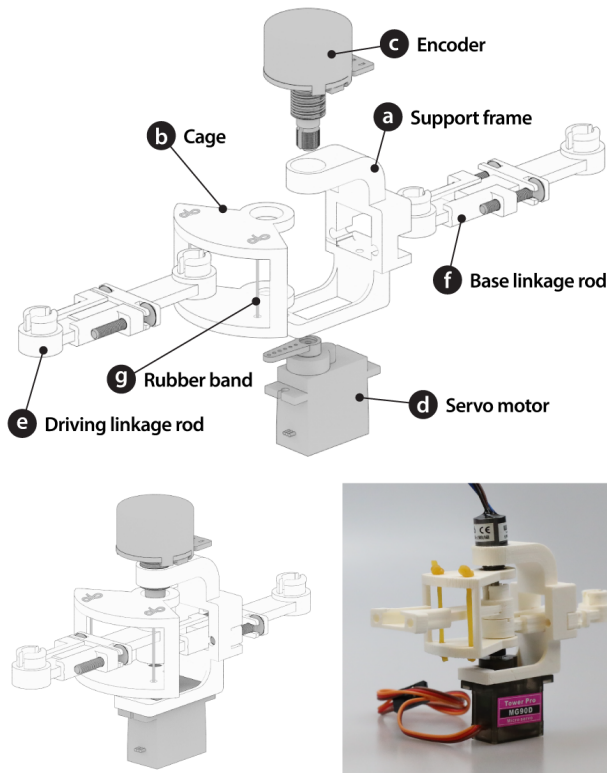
Design of the actuating module composed of (a) support frame and (b) moving cage. The support frame equips (c) encoder and (d) servo motor to control angle between (f) driving and (e) base linkage rods. (g) Rubber bands can be added when restoration force is needed.
